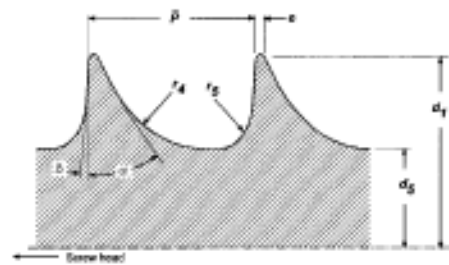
Schematic of HB Screw Thread Dimensions (Tabla A5.4)
